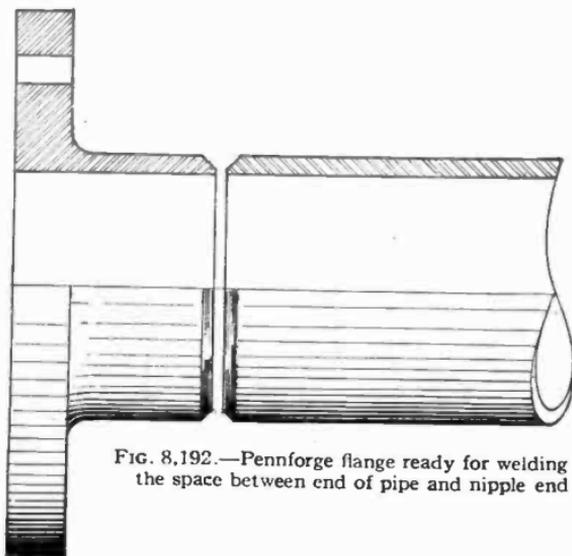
,192.—Pennforge flange ready for welding to pipe. Note the space between end of pipe and nipple end of flange.
